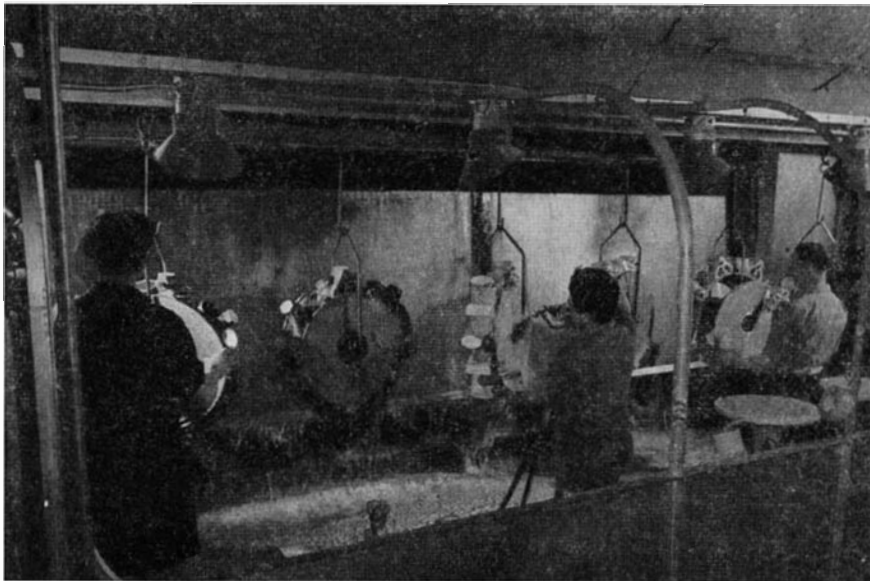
Supercharger sections passing on conveyors through a paint spray room
